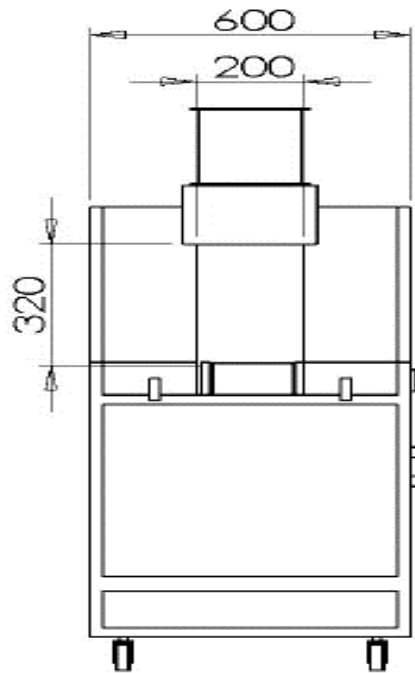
Inlet and outlet dimensions of steam shrink tunnel
